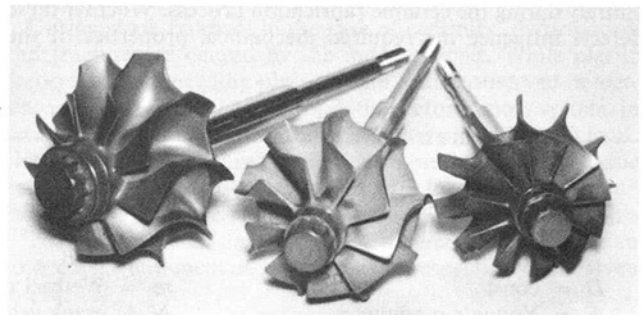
Three types of ceramic turbocharger rotors: left: CN-1, center: CNR-1, right: T-25
